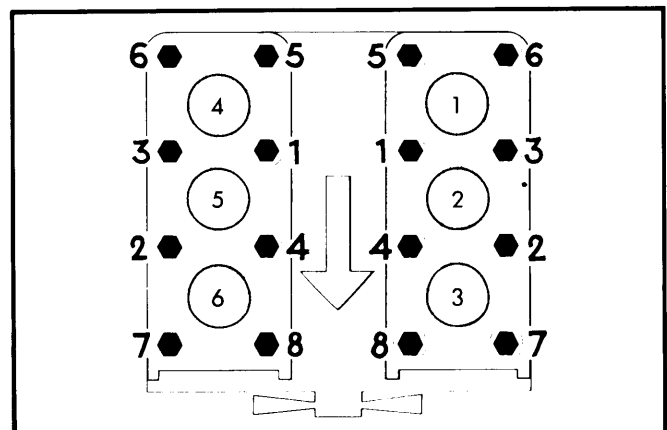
Sequence for Removing and Installing Cylinder Head Bolts
